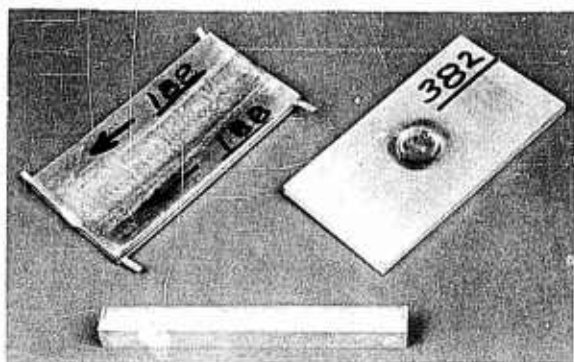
Explosive seam and spot welds in aluminum alloy 2024-T3, multilayer specimens
